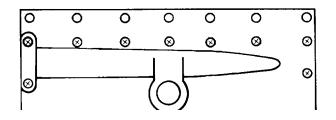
I-8. Installation of the Cover to the Lubricating Oil Cooler Housing
